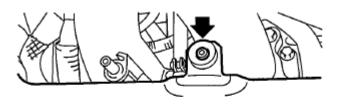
Locating Intake Duct Courtesy of SUBARU OF AMERICA, INC.
